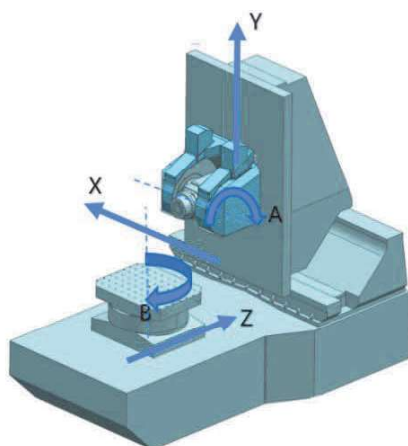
Horizontal machining center with a rotary table and tilting head (HT)
